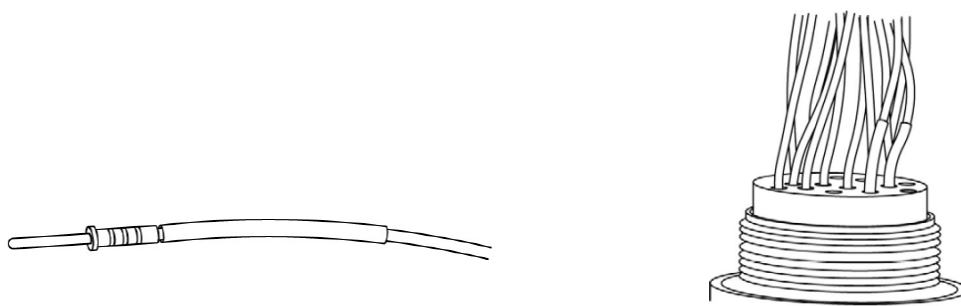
Wire insulation built up with heat shrink installed in connector.
